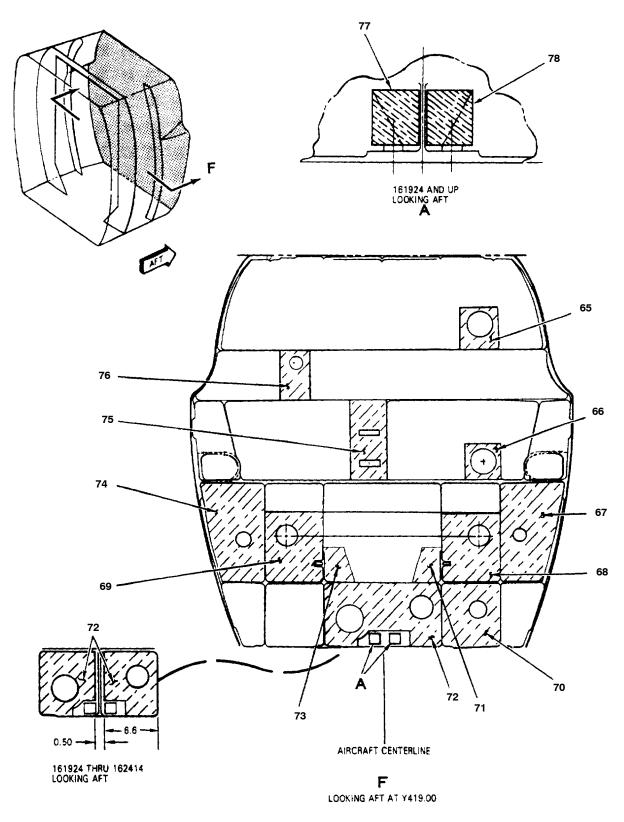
No. 2 Fuel Tank Cavity Foam Filler - 161742 AND UP (Sheet 5)
